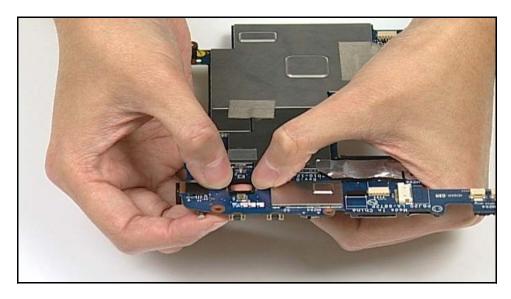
Removing Rear CCD Holder (1 of 3)
